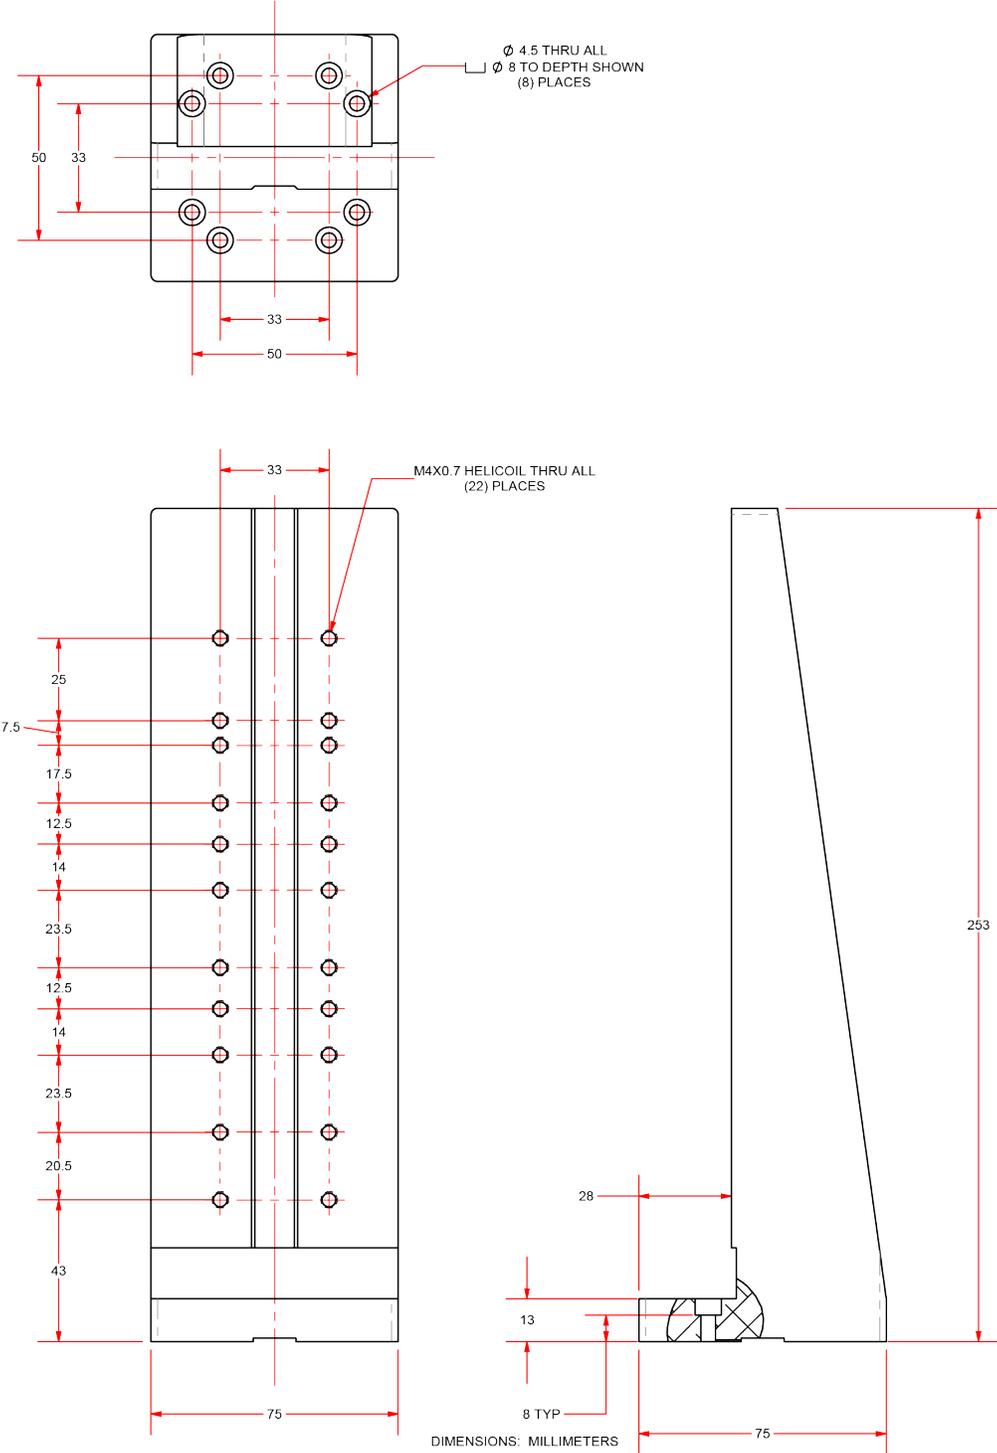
MPS75SL/SLE HDZ Angle Bracket Dimensions
